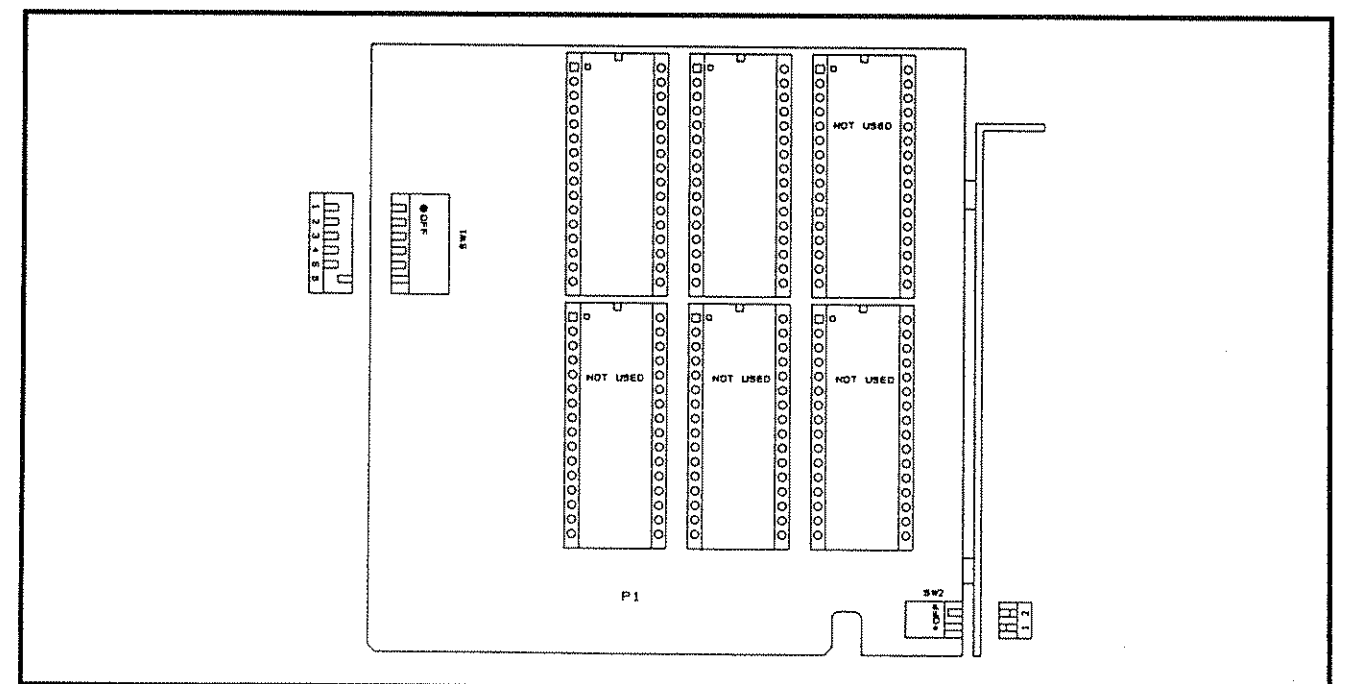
ROM Disk Board Assy 4A3, DIP Switch Settings.
